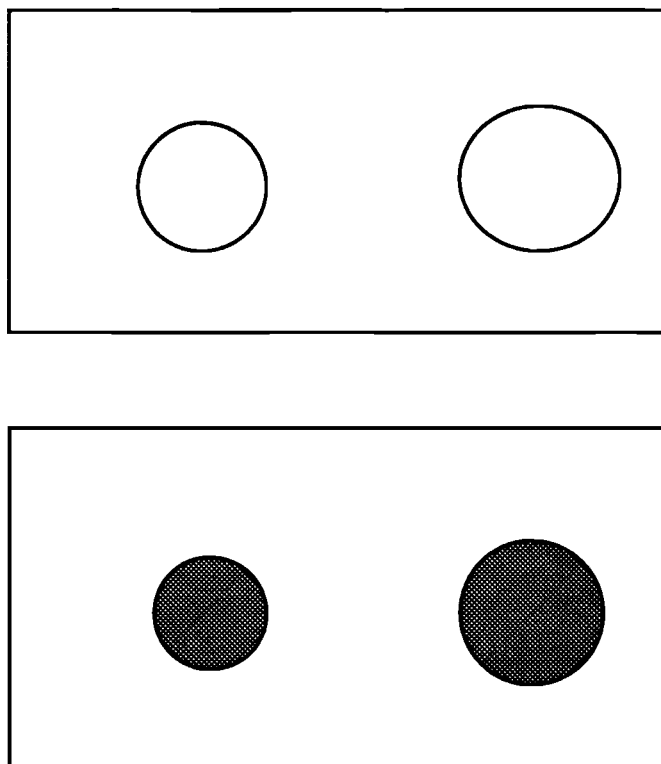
Two components of the assembly which consist of mating feature-pair
